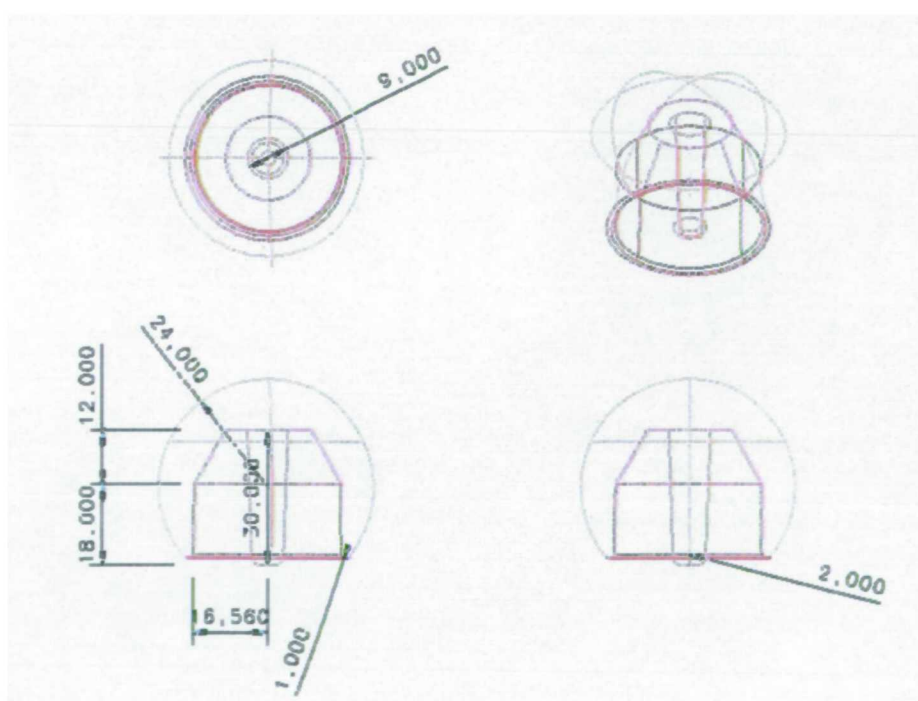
Femoral component drawing (dimensions in mm).
